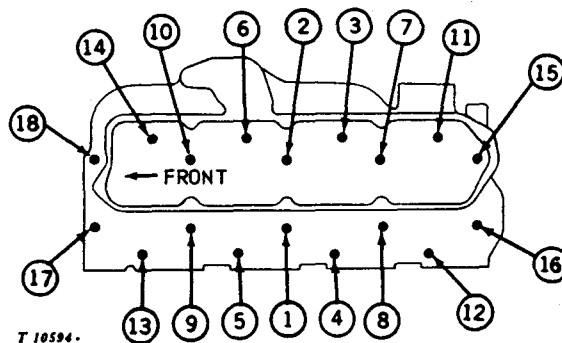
Four Cylinder Cylinder Head Torque Sequence
